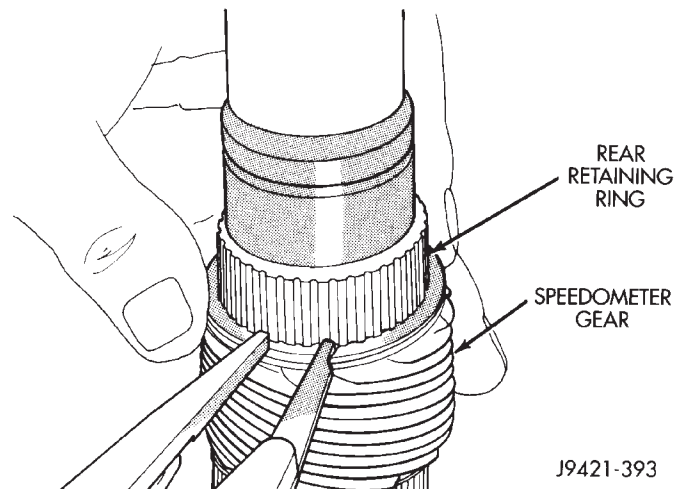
Speedometer Gear Rear Snap Ring Removal
